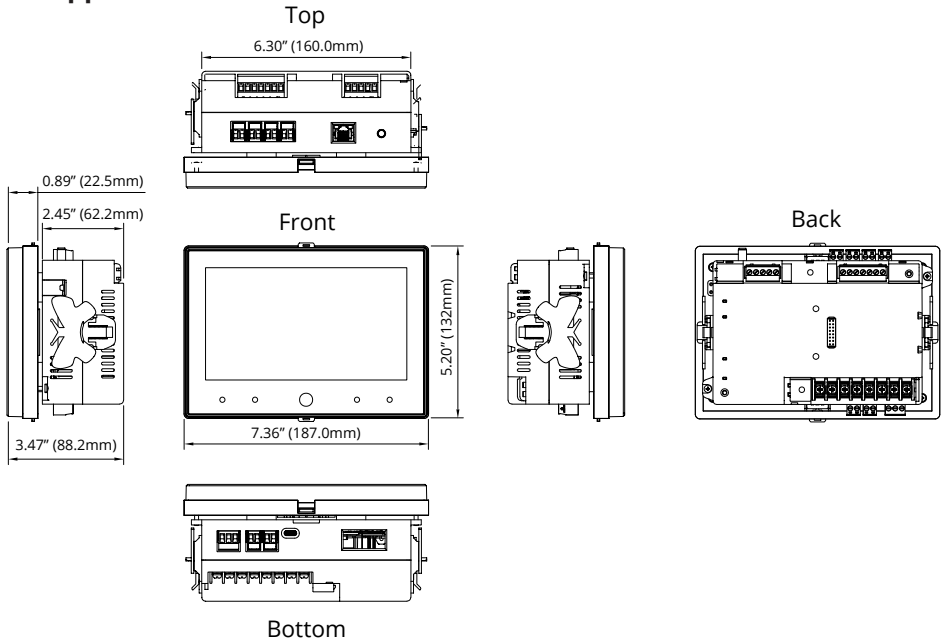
Acuvim 3 Panel Mount Appearance and Dimensions
